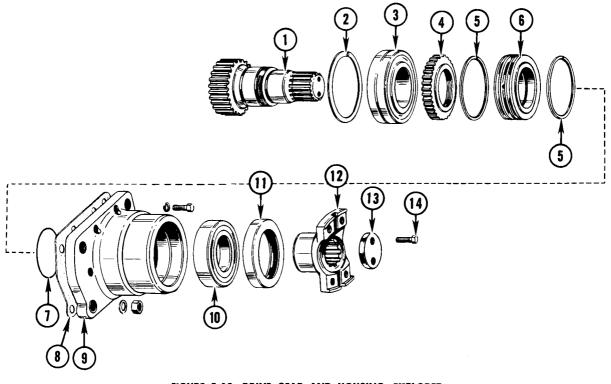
DRIVE GEAR AND HOUSING, EXPLODED
